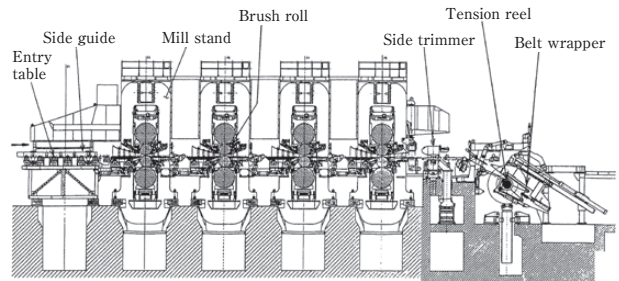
Hot rolling finisher mill (4Hi-4stand tandem mill)<sup>19)</sup>.
